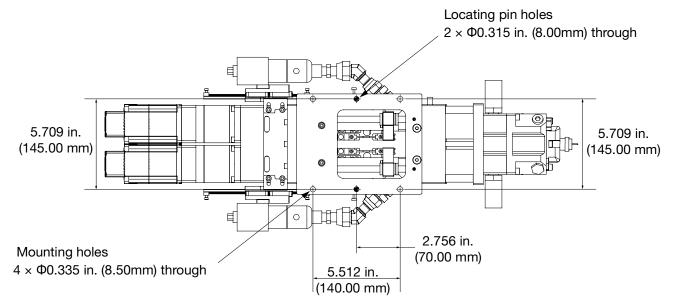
Mounting Hole Dimensions for Installing the PR-Xv Metering Unit - Supply Pump Feed
